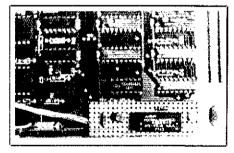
Mounting details of the transmitter interface circuit. The perf board containing the components is mounted with an existing screw in the back left corner of the computer case.
